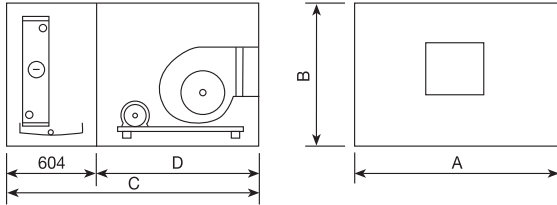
Dimensions (mm) for horizontal units (floor mounted)
